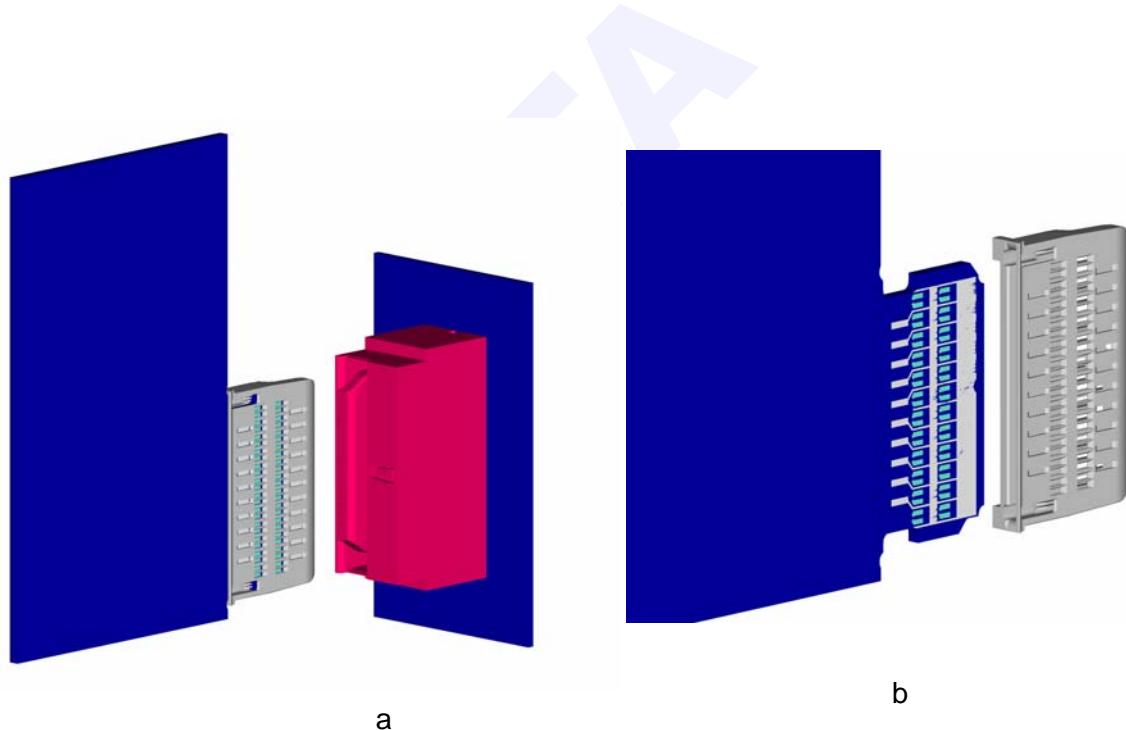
Backplane connector and board paddle (a), paddle guard assembly (b)
